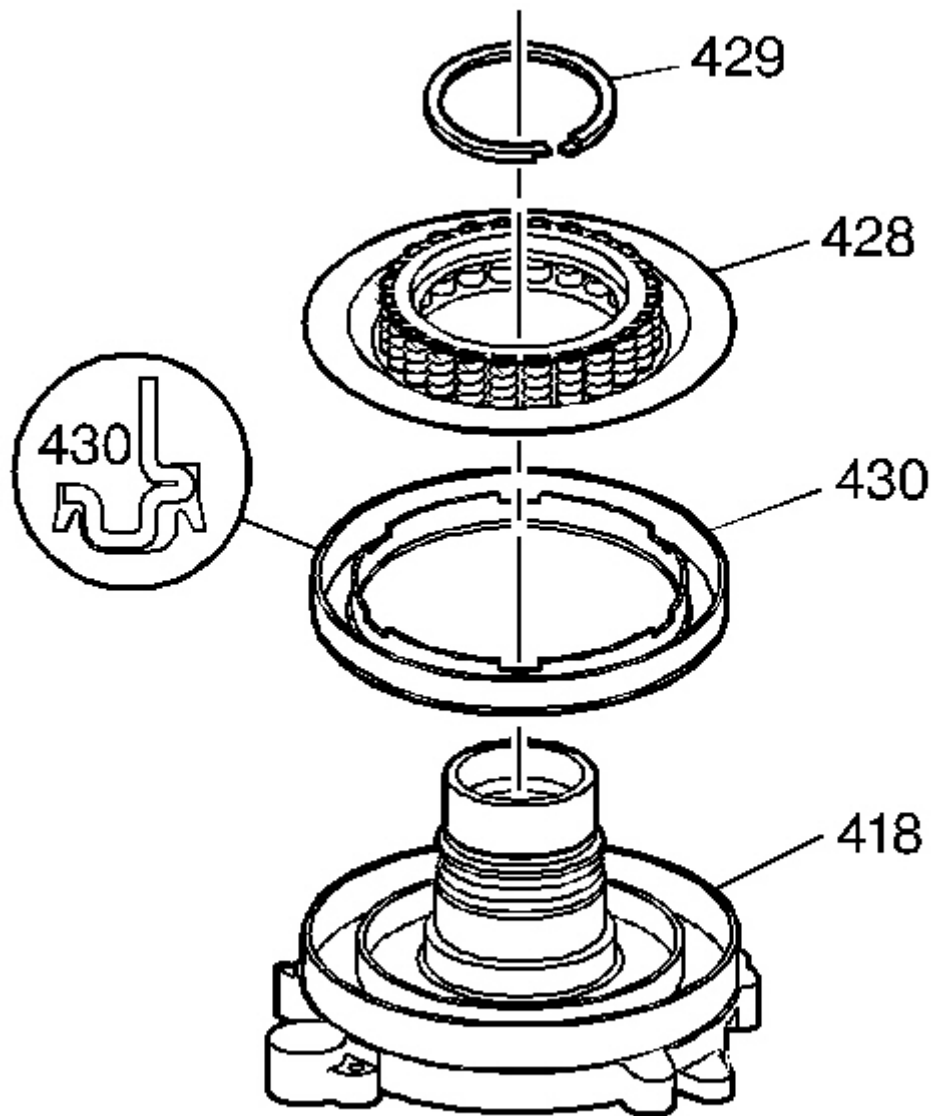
Piston Assembly & Return Spring And Retainer Assembly Inspection Points
